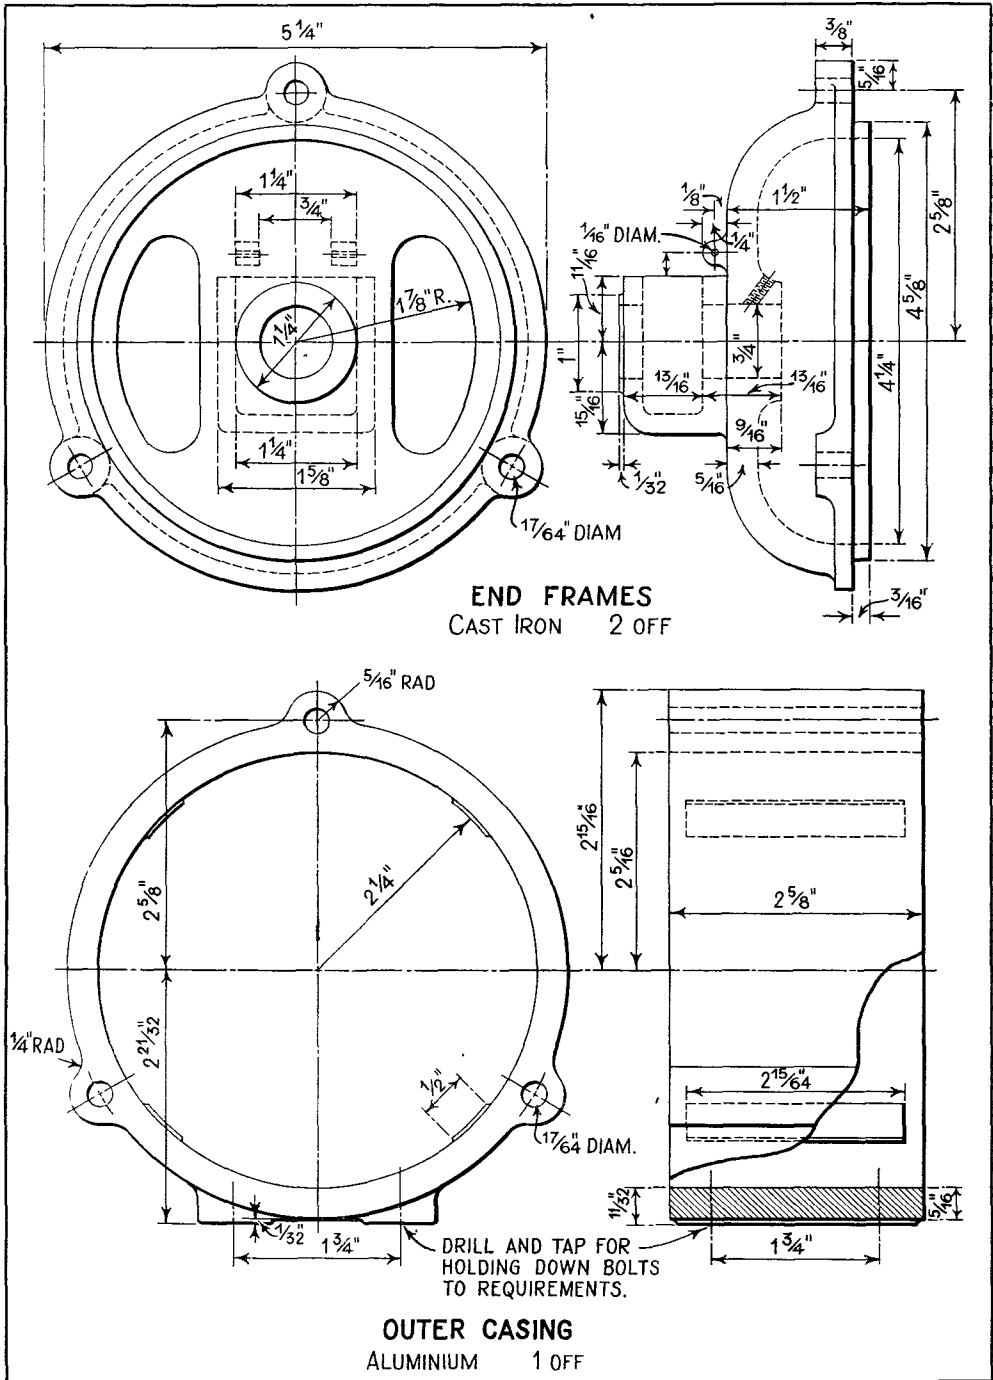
SHOWING DIMENSIONS OF THE END FRAMES AND OUTER CASING.
